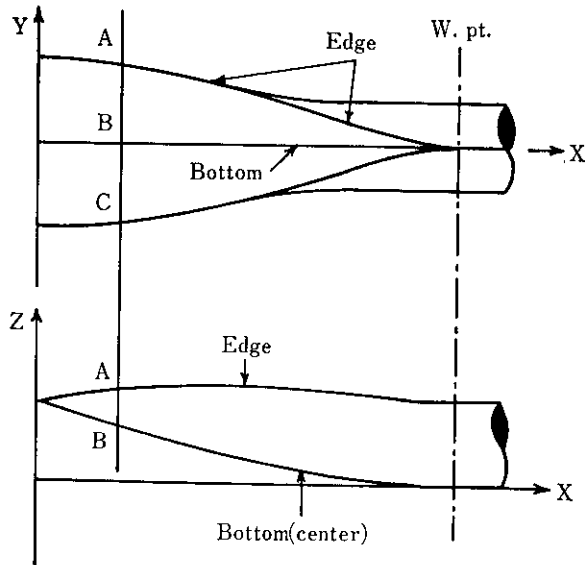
Plan and side views of sheet deformation in pipe forming process
